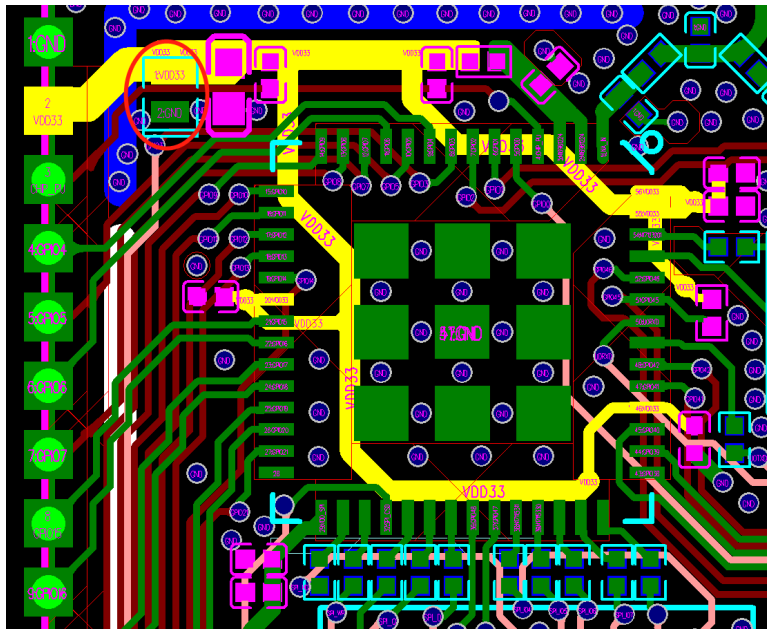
ESP32-S3 Power Traces in a Four-layer PCB Design
